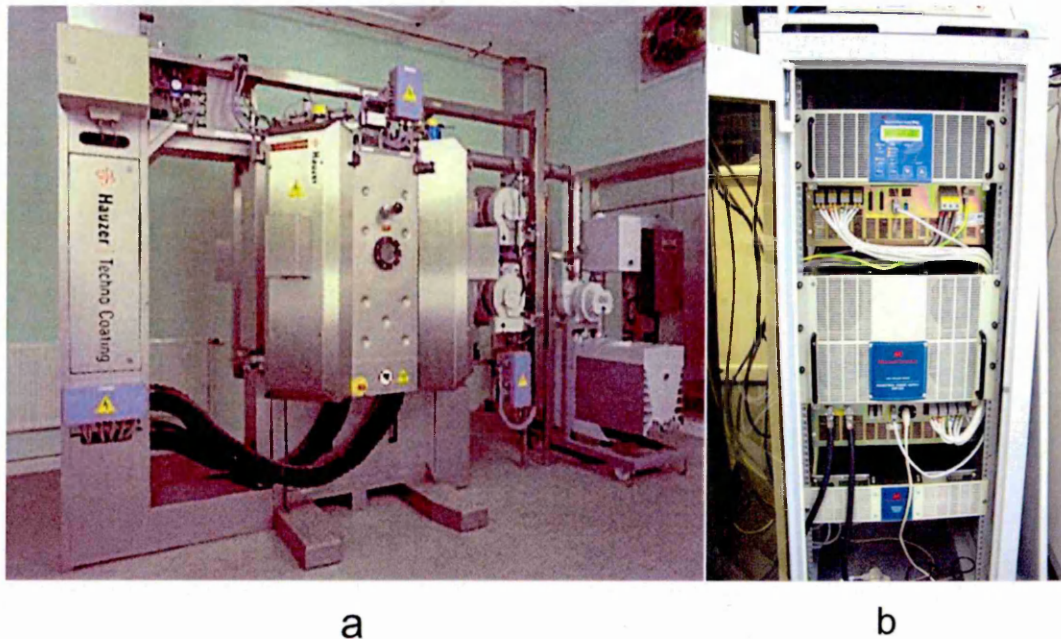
a) Photograph of HTC 1000-4 coating machine b) Photograph of HIPIMS power supply
